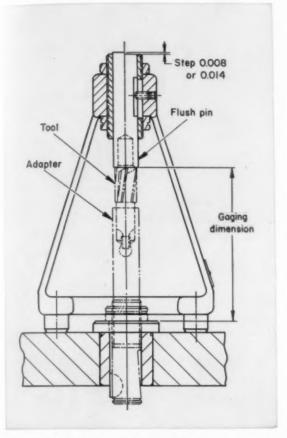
Flush-pin gage designed to preset tools by measuring distance between cutting edge and adapter nut. Inside of flush pin is machined to contour of cutting edge.
